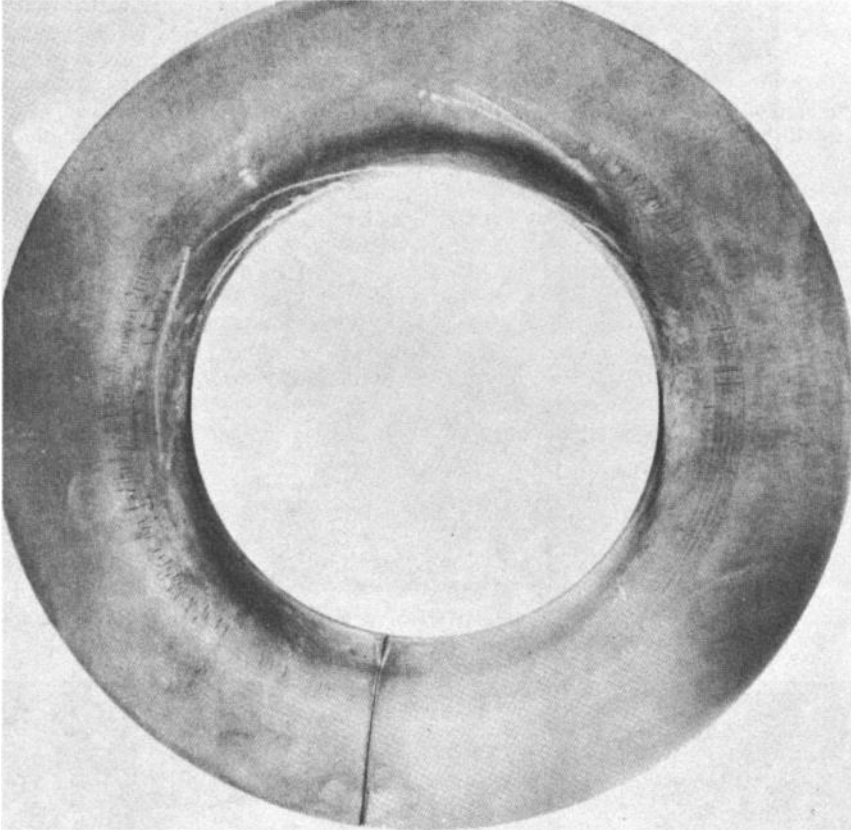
Failure of a high-carbon, high-chromium drawing die due to grinding cracks. Grinding cracks around the inner diameter were revealed by deep etching
